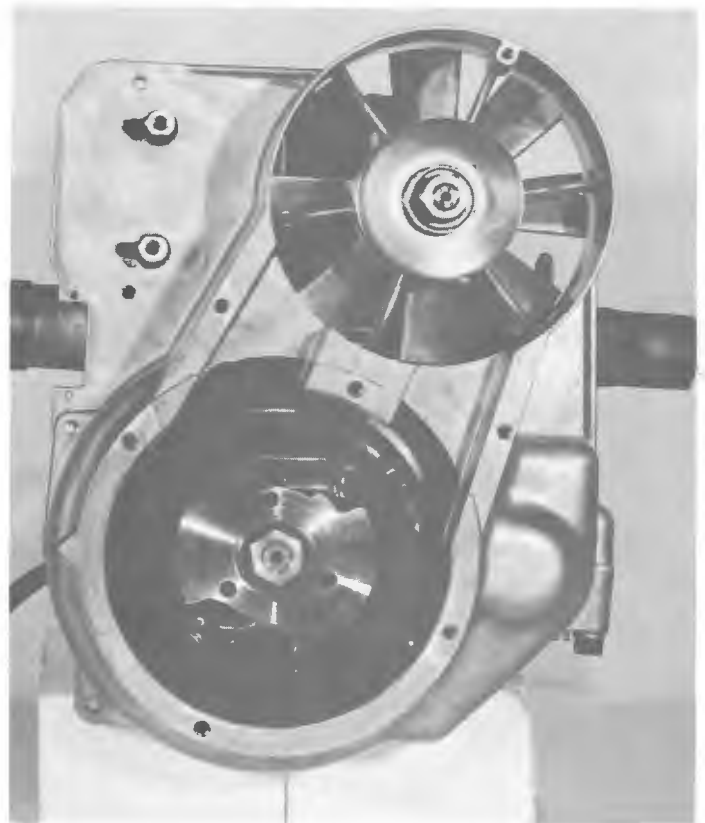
FAN COVER AND FLYWHEEL INSTALLED
